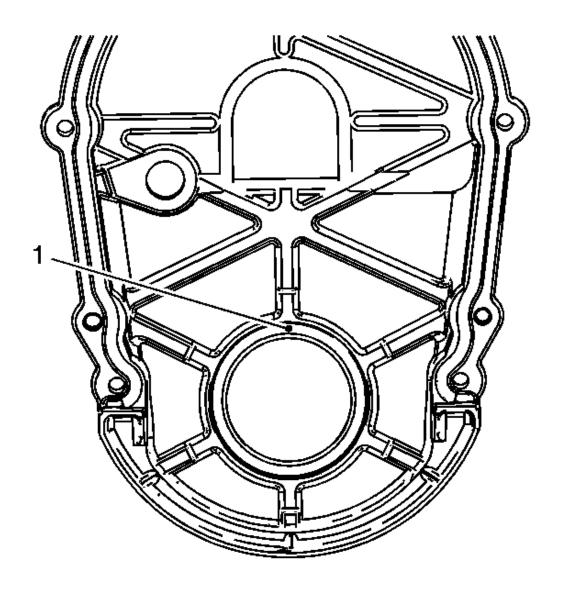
Identifying Mark On Rear Of Crankshaft Front Oil Seal Courtesy of GENERAL MOTORS CORP.
